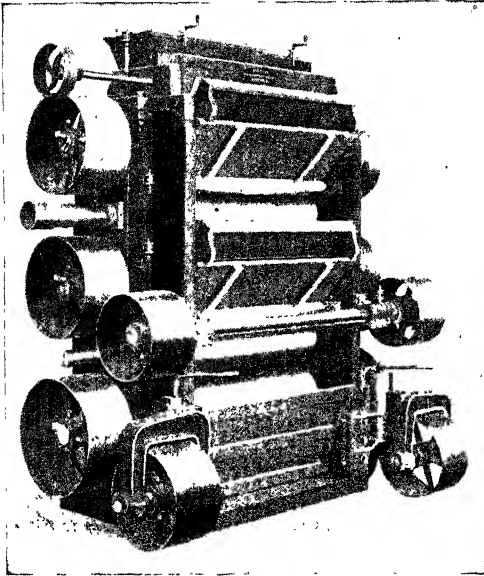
BUCKEYE CRUSHING ROLLS. UNIVERSAL TAKE-UP, SINGLE BELT DRIVE.
